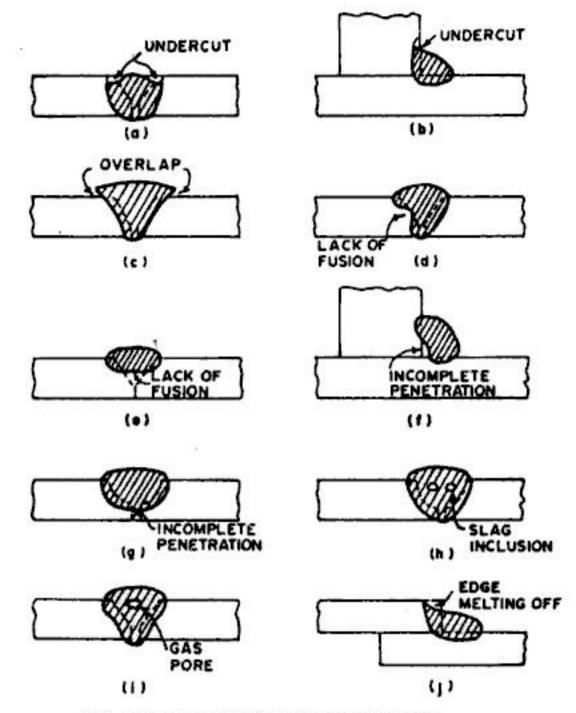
IMPORTANT WELD DEFECTS.
